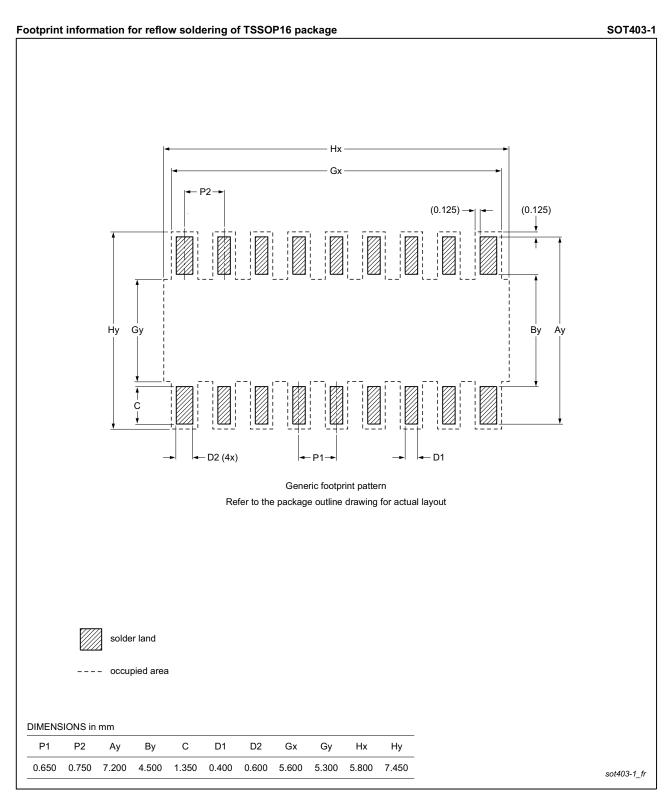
PCB footprint for SOT403-1 (TSSOP16); reflow soldering
